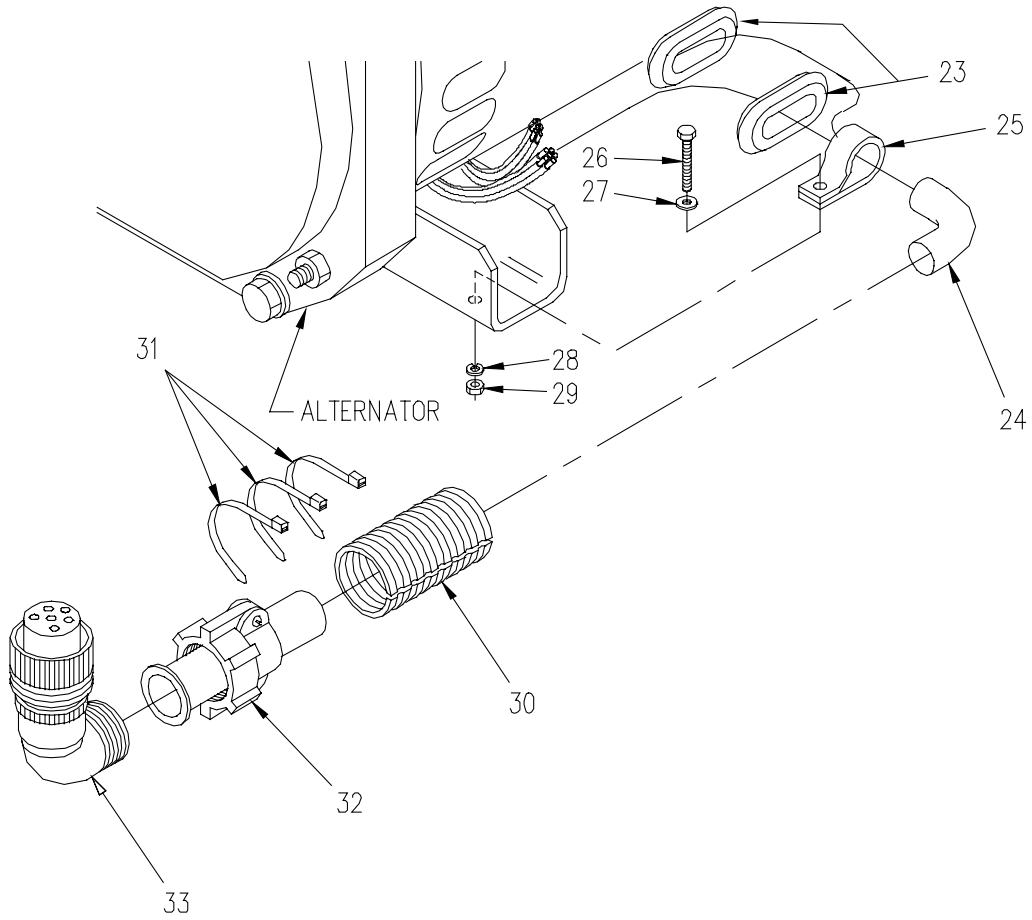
Engine Alternator Assembly (MEP-531A) (Sheet 2 of 2)
